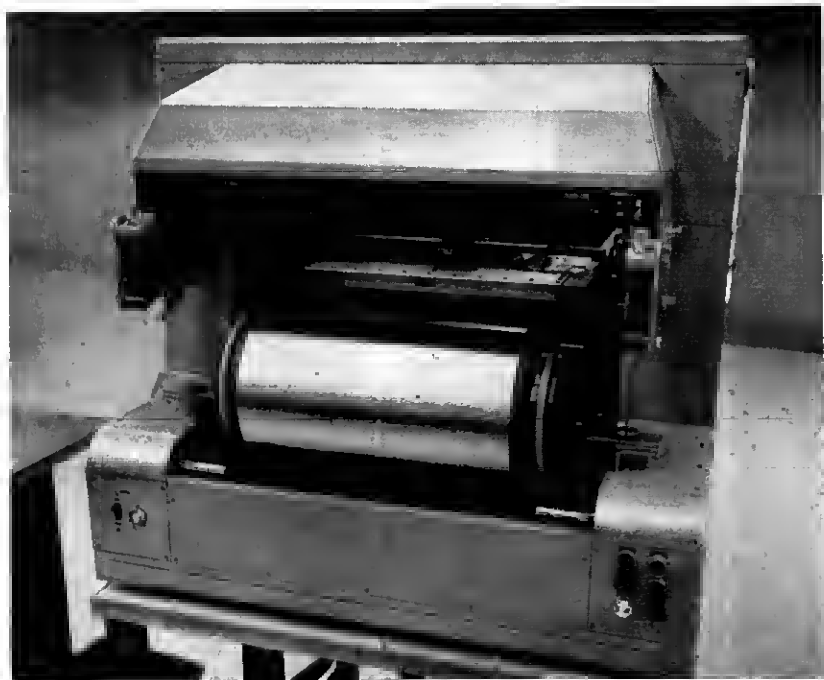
Copper foil wrapped on epoxy coated repeater unit by machine.
